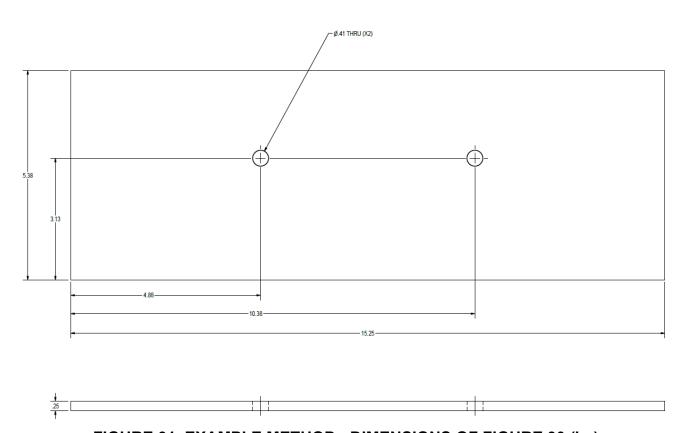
EXAMPLE METHOD - DIMENSIONS OF FIGURE 30 (in.)
